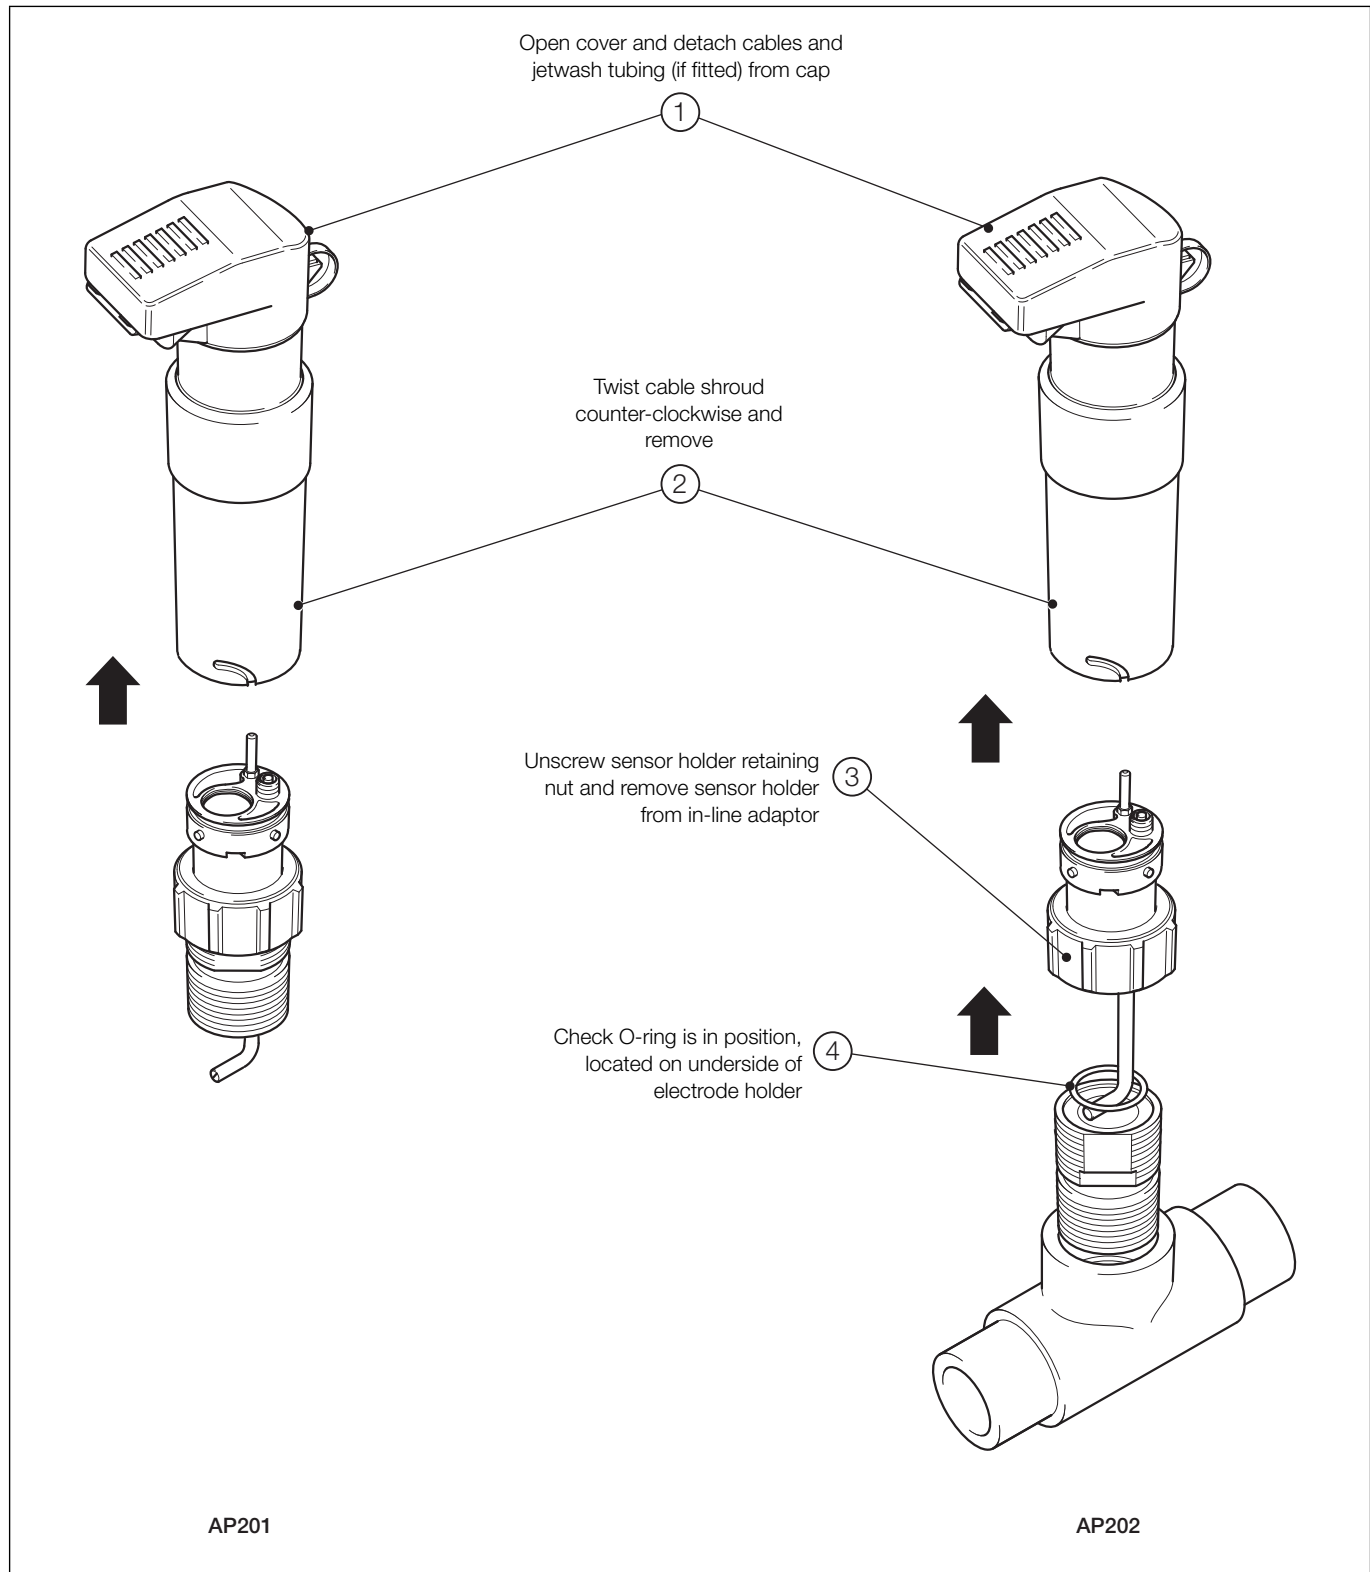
Models AP201 and AP202 – Removing the Sensor Holder
